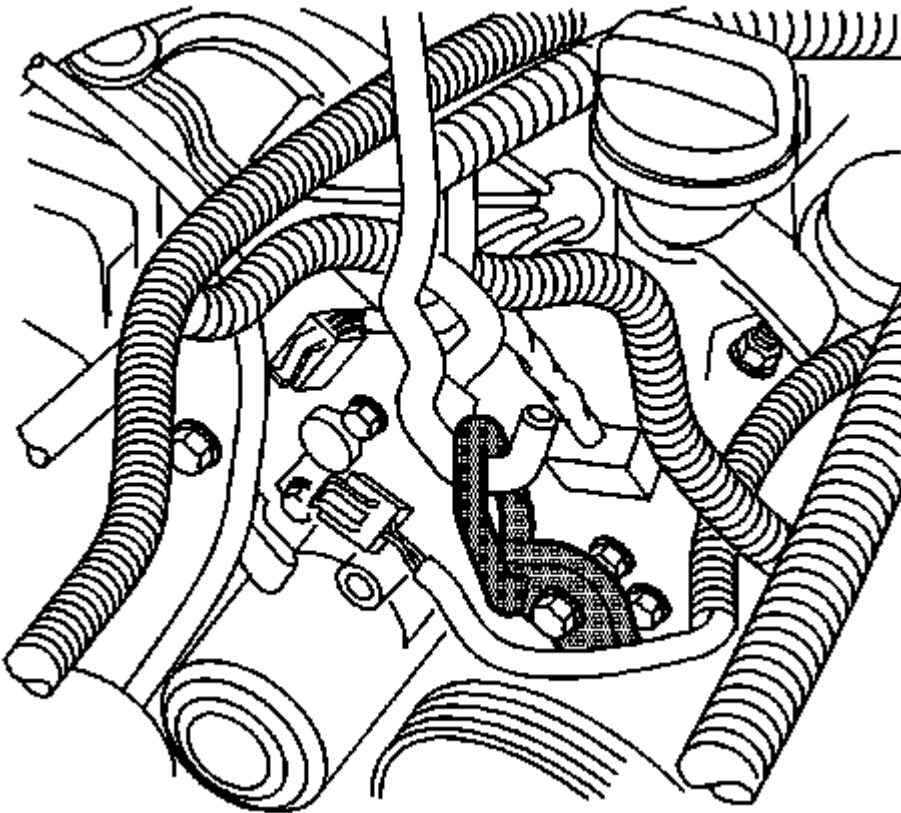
Identifying Lift Hook Assembly To Left Side Engine Lift Hook Bracket
